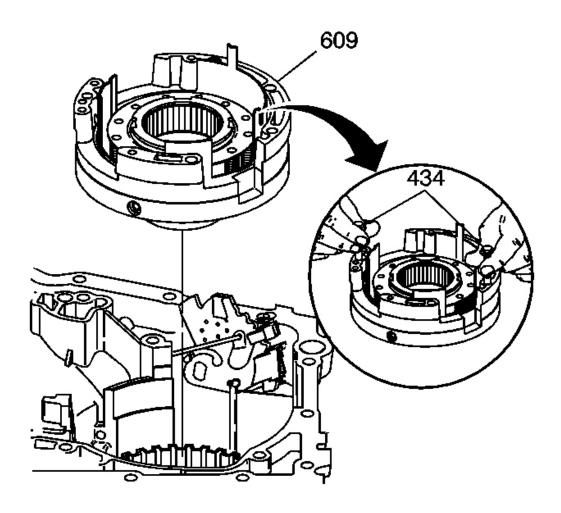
Installing Case Cover Bolts Into Driven Sprocket Support Assembly Courtesy of GENERAL MOTORS CORP.
